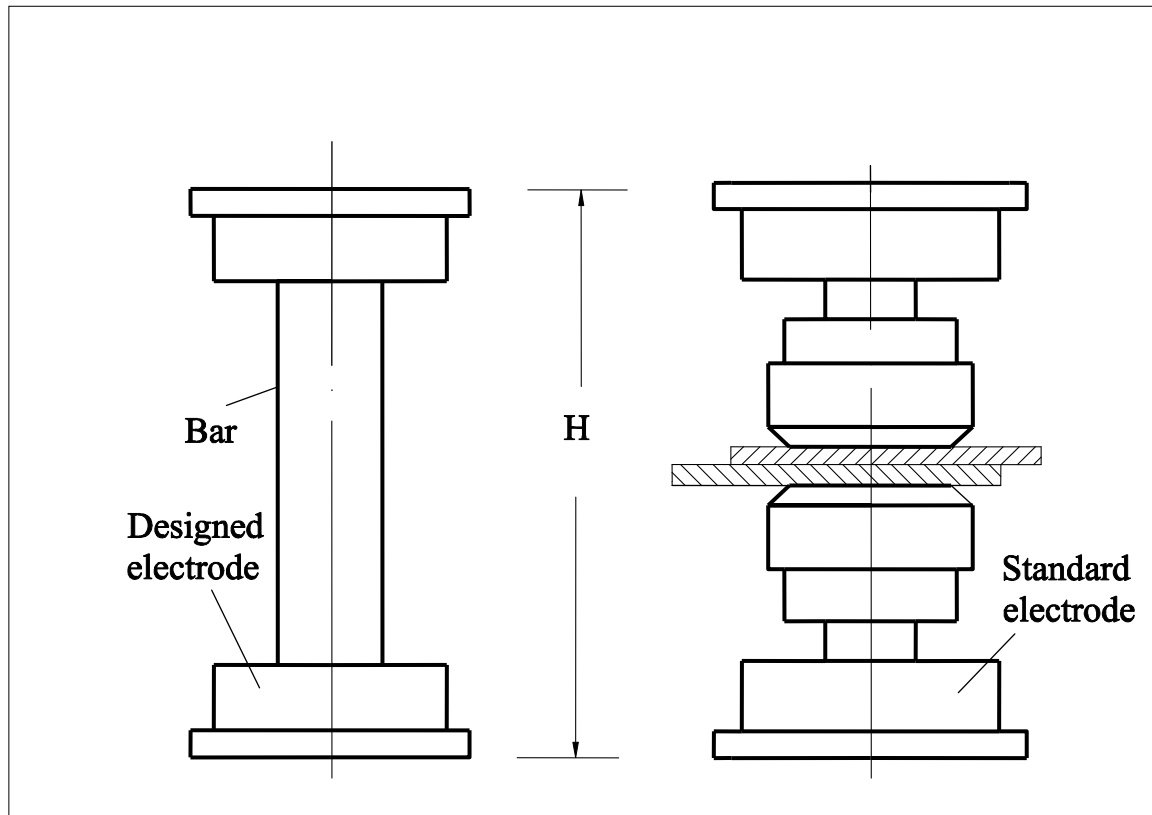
Set-up of proof resistance compared to welding set-up.
